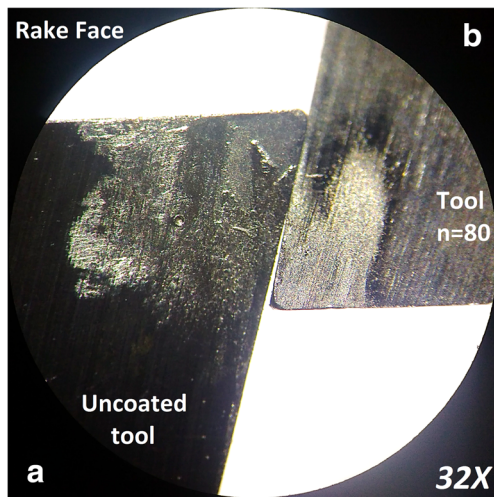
Comparative image in optical microscopy (32×) of rake face after machining test: a uncoated tool and b cutting tool coated with [HfN/VN]₈₀
